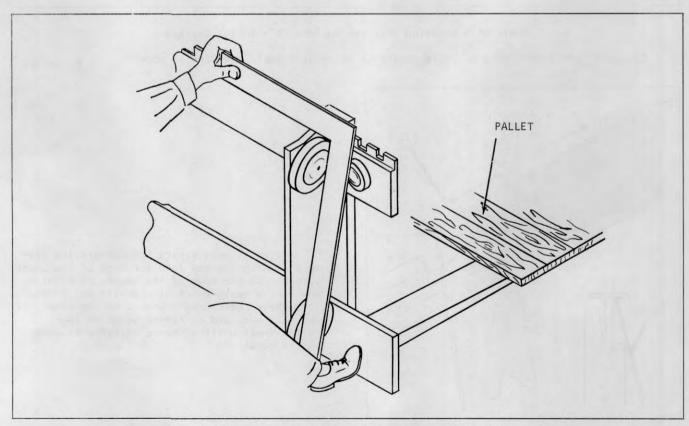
Squaring Carriage Rollers (Four Roller Carriage)
